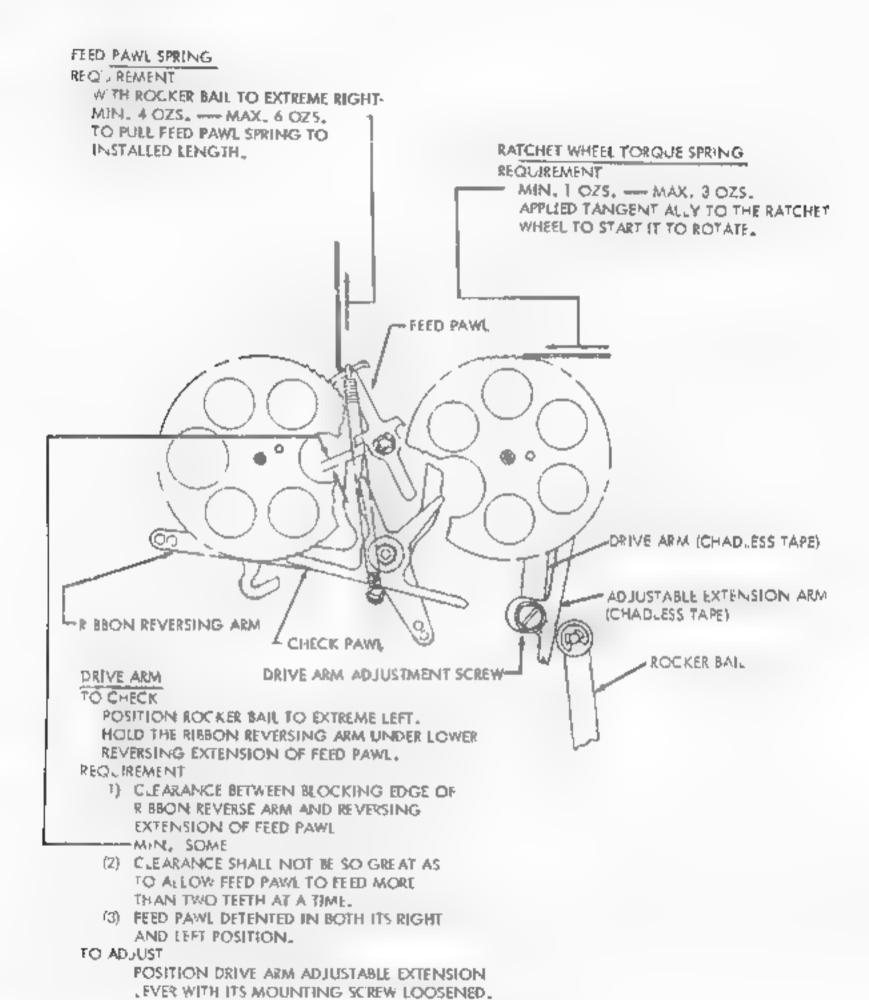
RIBBON FEED MECHANISM LATEST DESIGN
